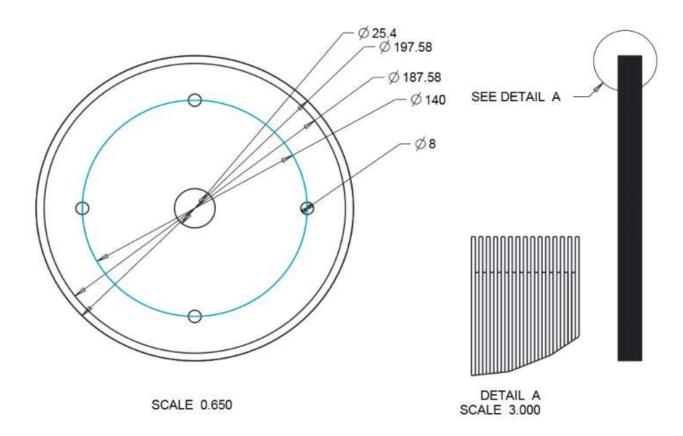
Engineering drawing of the fabricated labyrinth seal; all dimensions in mm.
